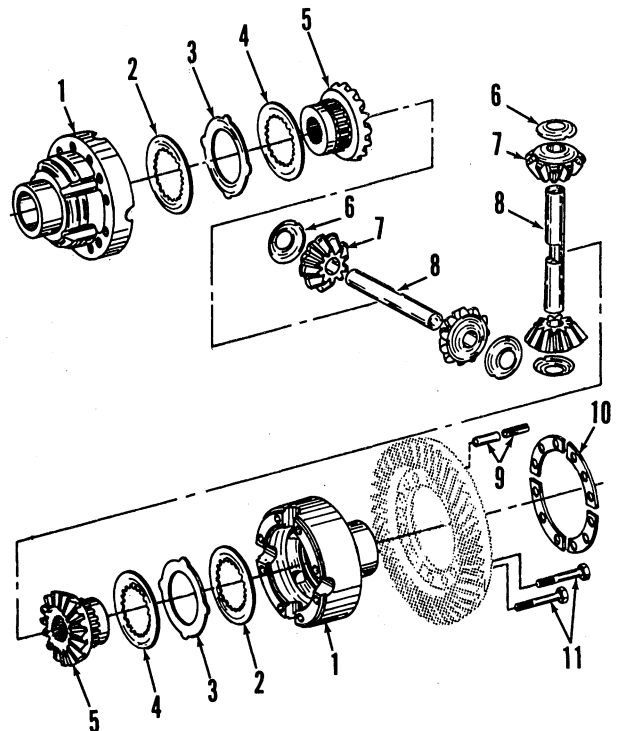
Exploded view of limited slip differential used in mechanical front-wheel drive axle on Models 4050, 4250 and 4450. Pressure plate (4) is available in different thicknesses to adjust pinion gear backlash.
